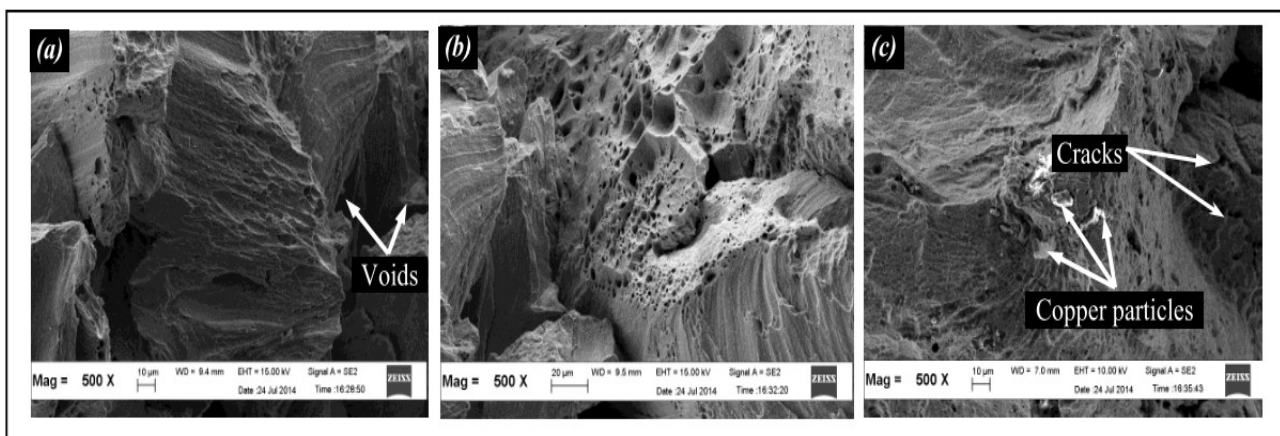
FESEM images showing the tensile fracture surface modes of dissimilar Al-Cu joints produced by friction stir welding (FSW): (a) 1000 RPM, (b) 1750 RPM and (c) 2000 RPM [46]
